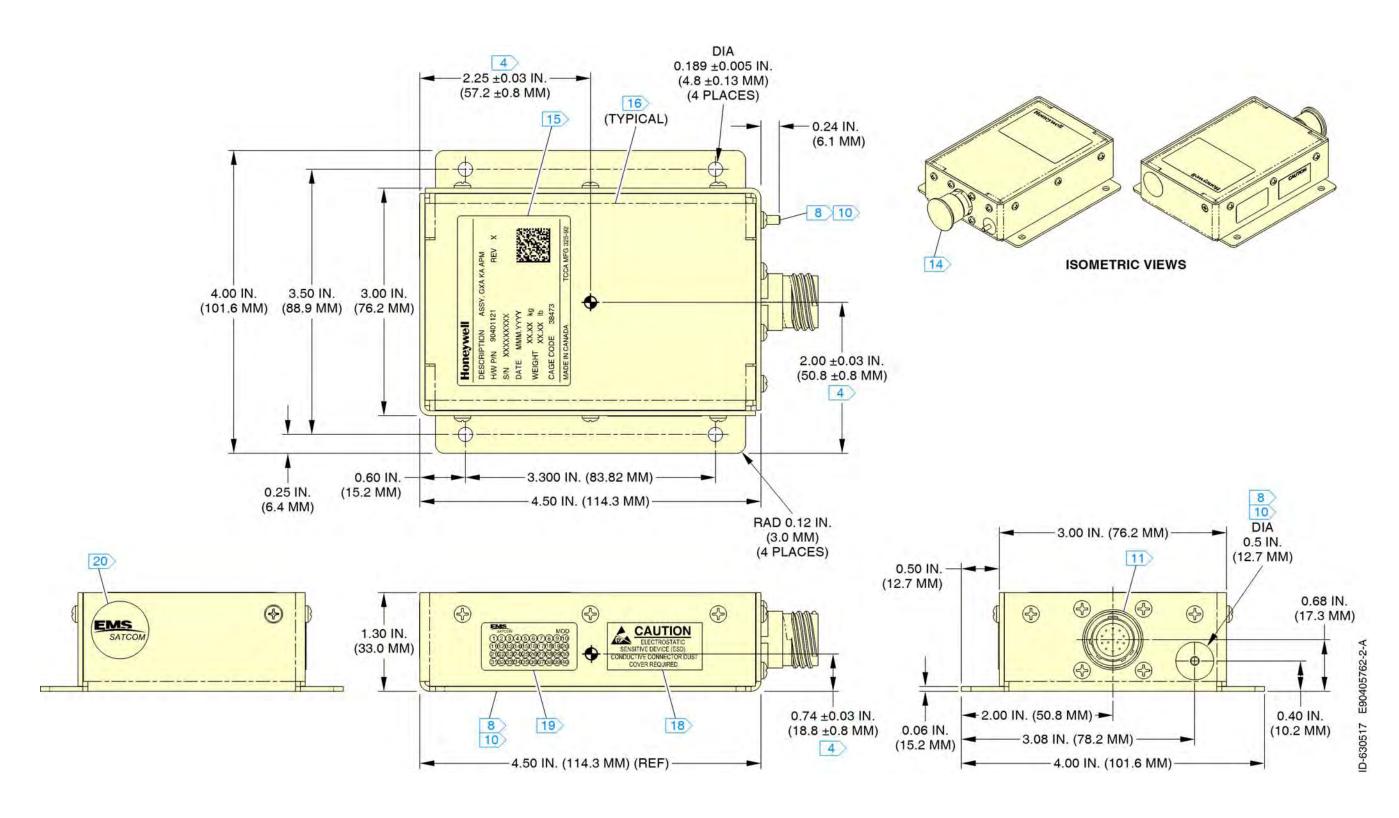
(Sheet 2 of 2) APM Outline and Installation Drawing (90405762, REV A)
